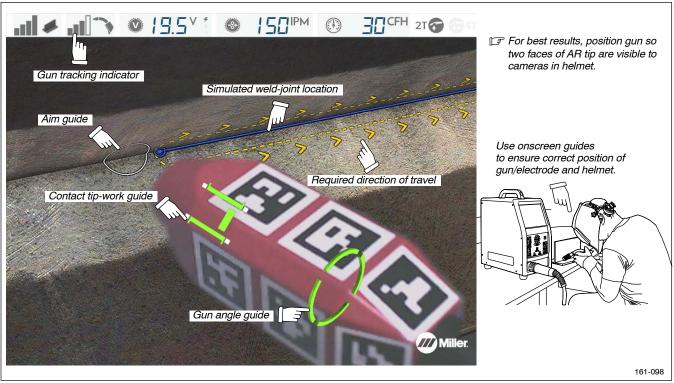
Review Gun/Electrode Positioning Guides Before Welding
